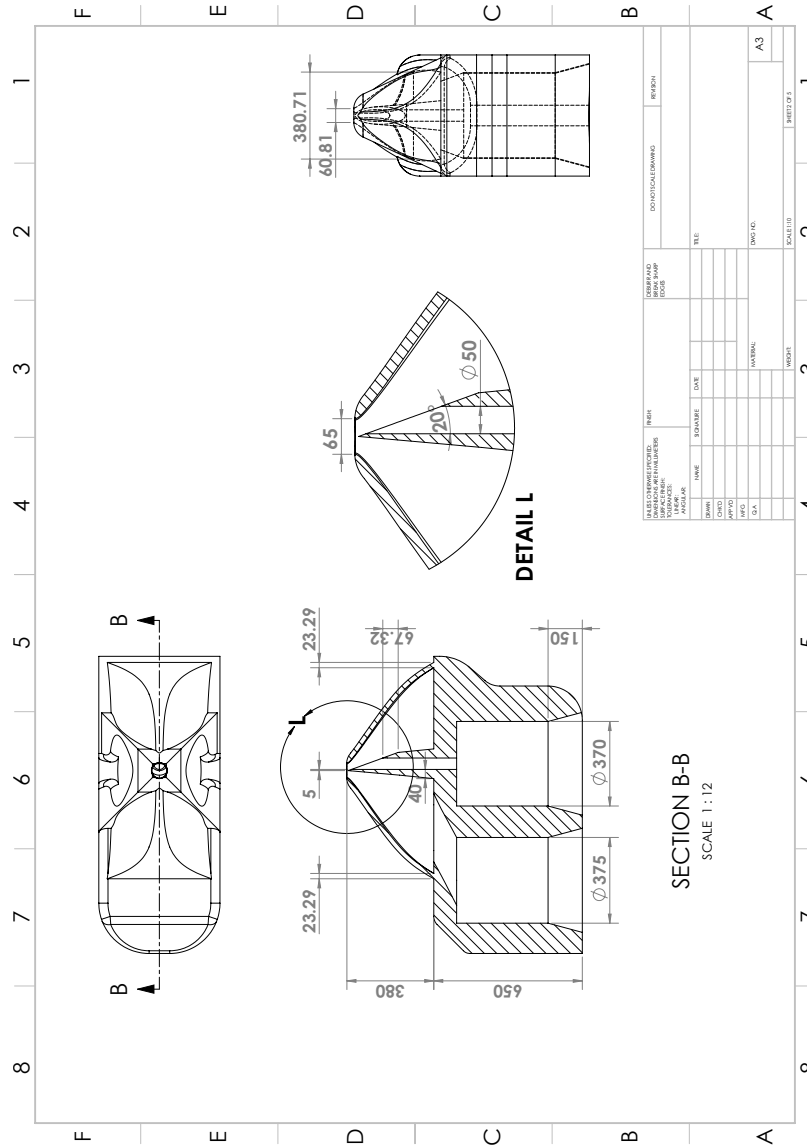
Sheet 2 of the 79 design; 3rd angle projection drawing of the design.
